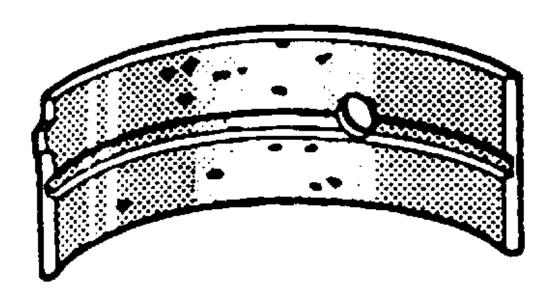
Identifying Crankshaft Bearing Craters Or Pockets Courtesy of GENERAL MOTORS CORP.
